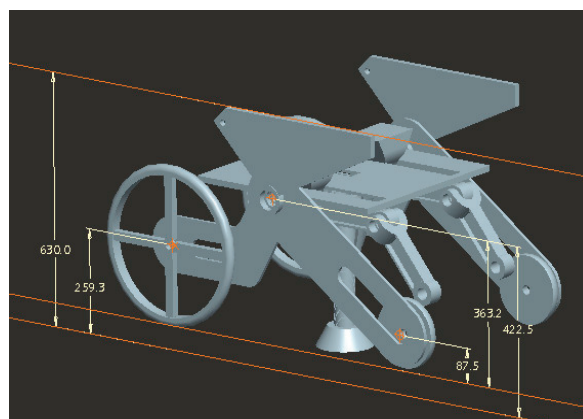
Solid model of the wheel chair and leg assembly with dimensions
